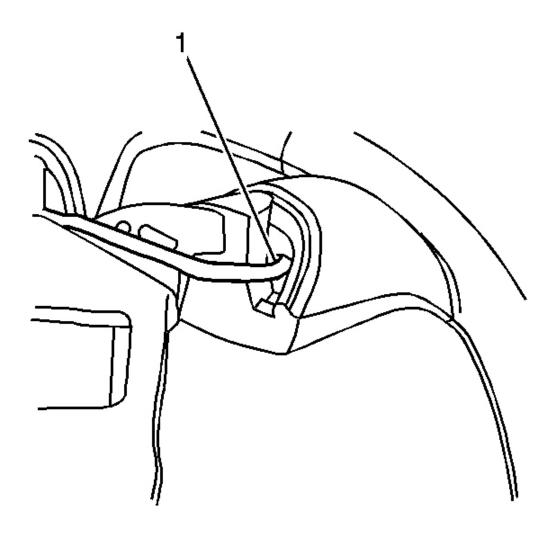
Positioning A Blunt Ended Tool Into The Wire Harness Cavity Courtesy of GENERAL MOTORS CORP.
